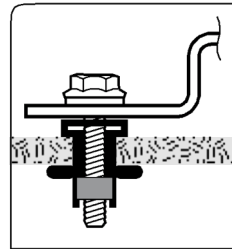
As the bolt is tightened, the neoprene body of the Well-Nut is compressed and expanded, forcing it tightly into the bolt's threads and against the inner surface of the thin RV roof material.
